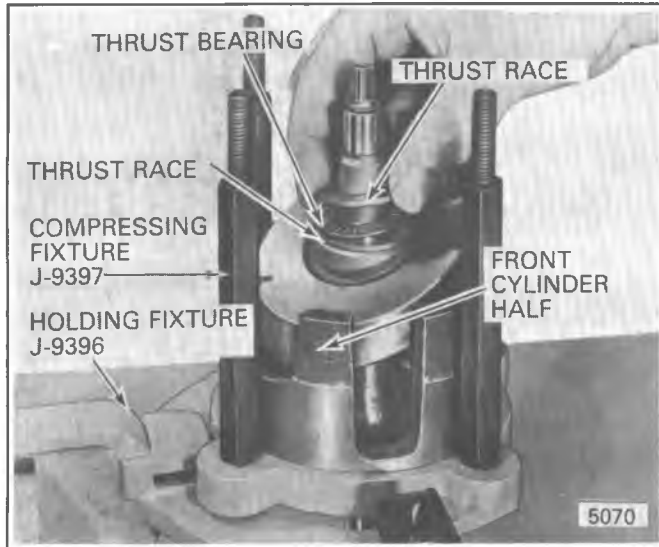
D-36 Installing A-6 Rear Thrust Races and Bearings
